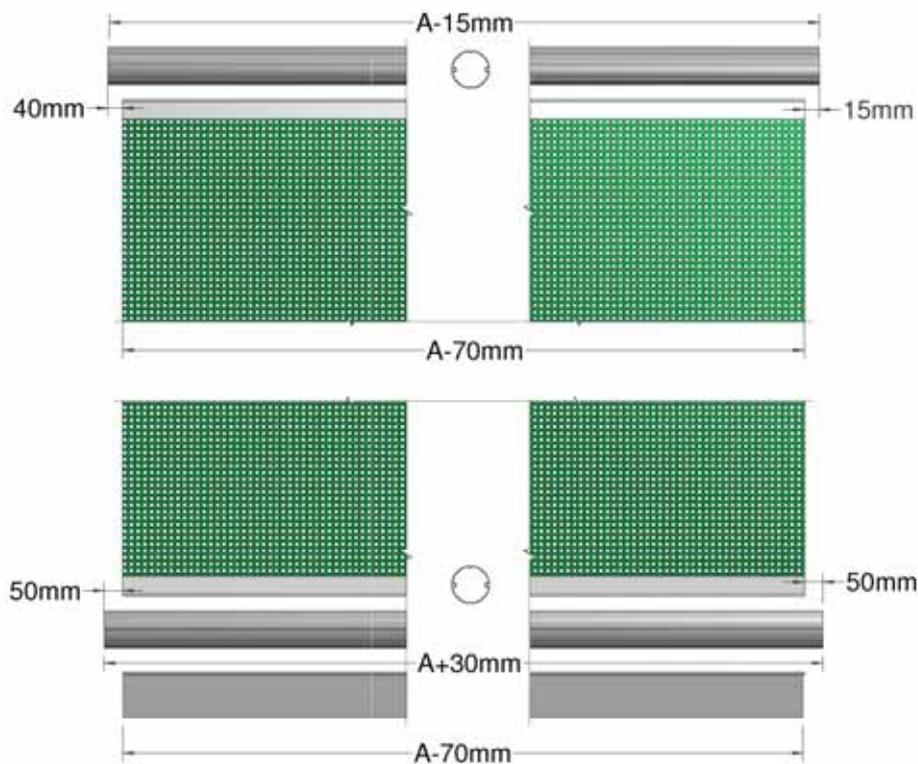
, Standard Cutting Lengths of Tubes and Fabric
